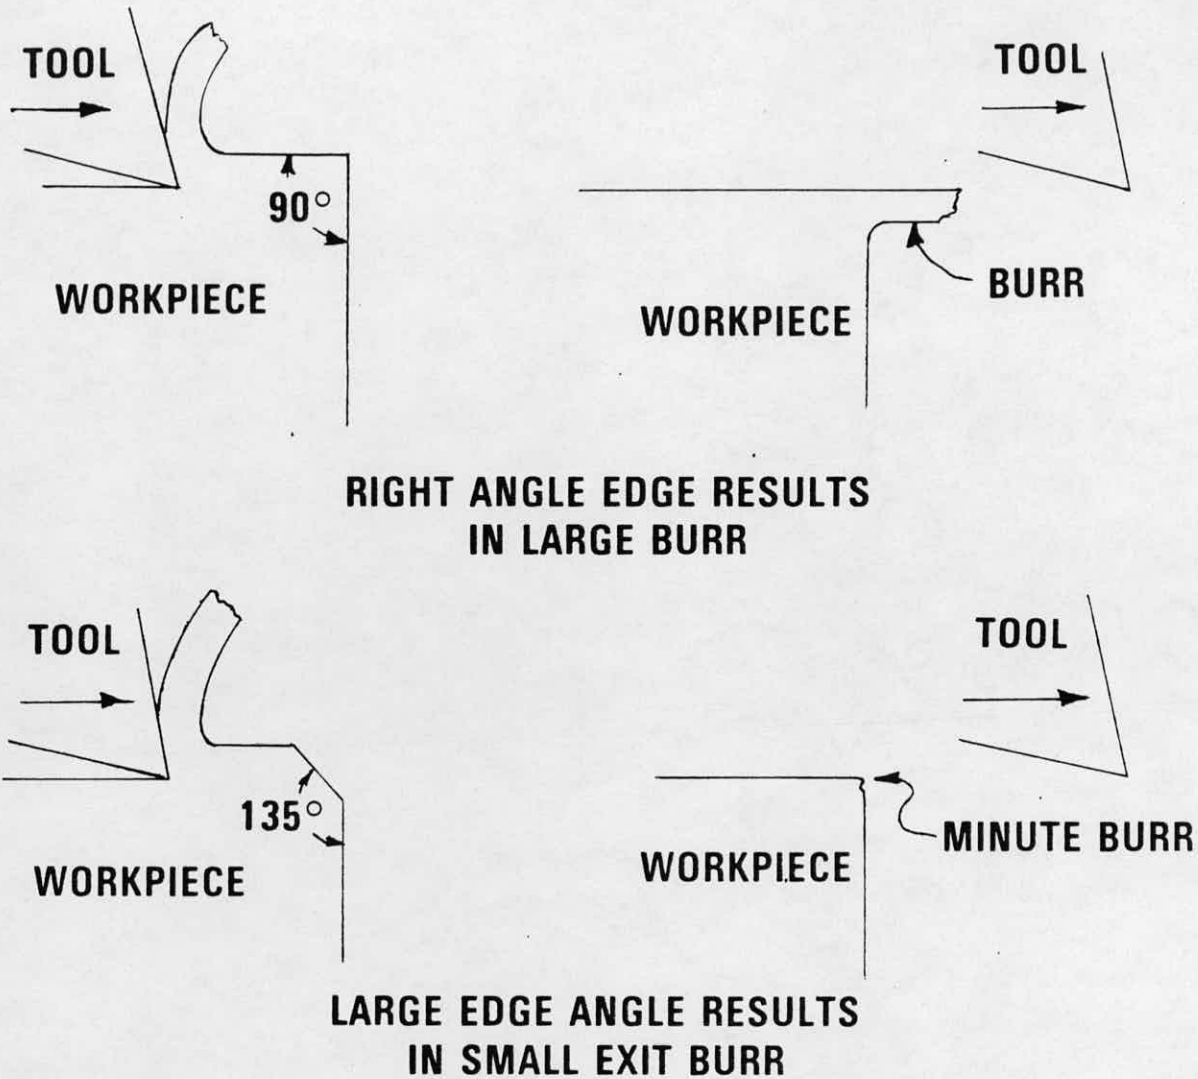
Chamfer Before Cutting Minimizes Burr Size
